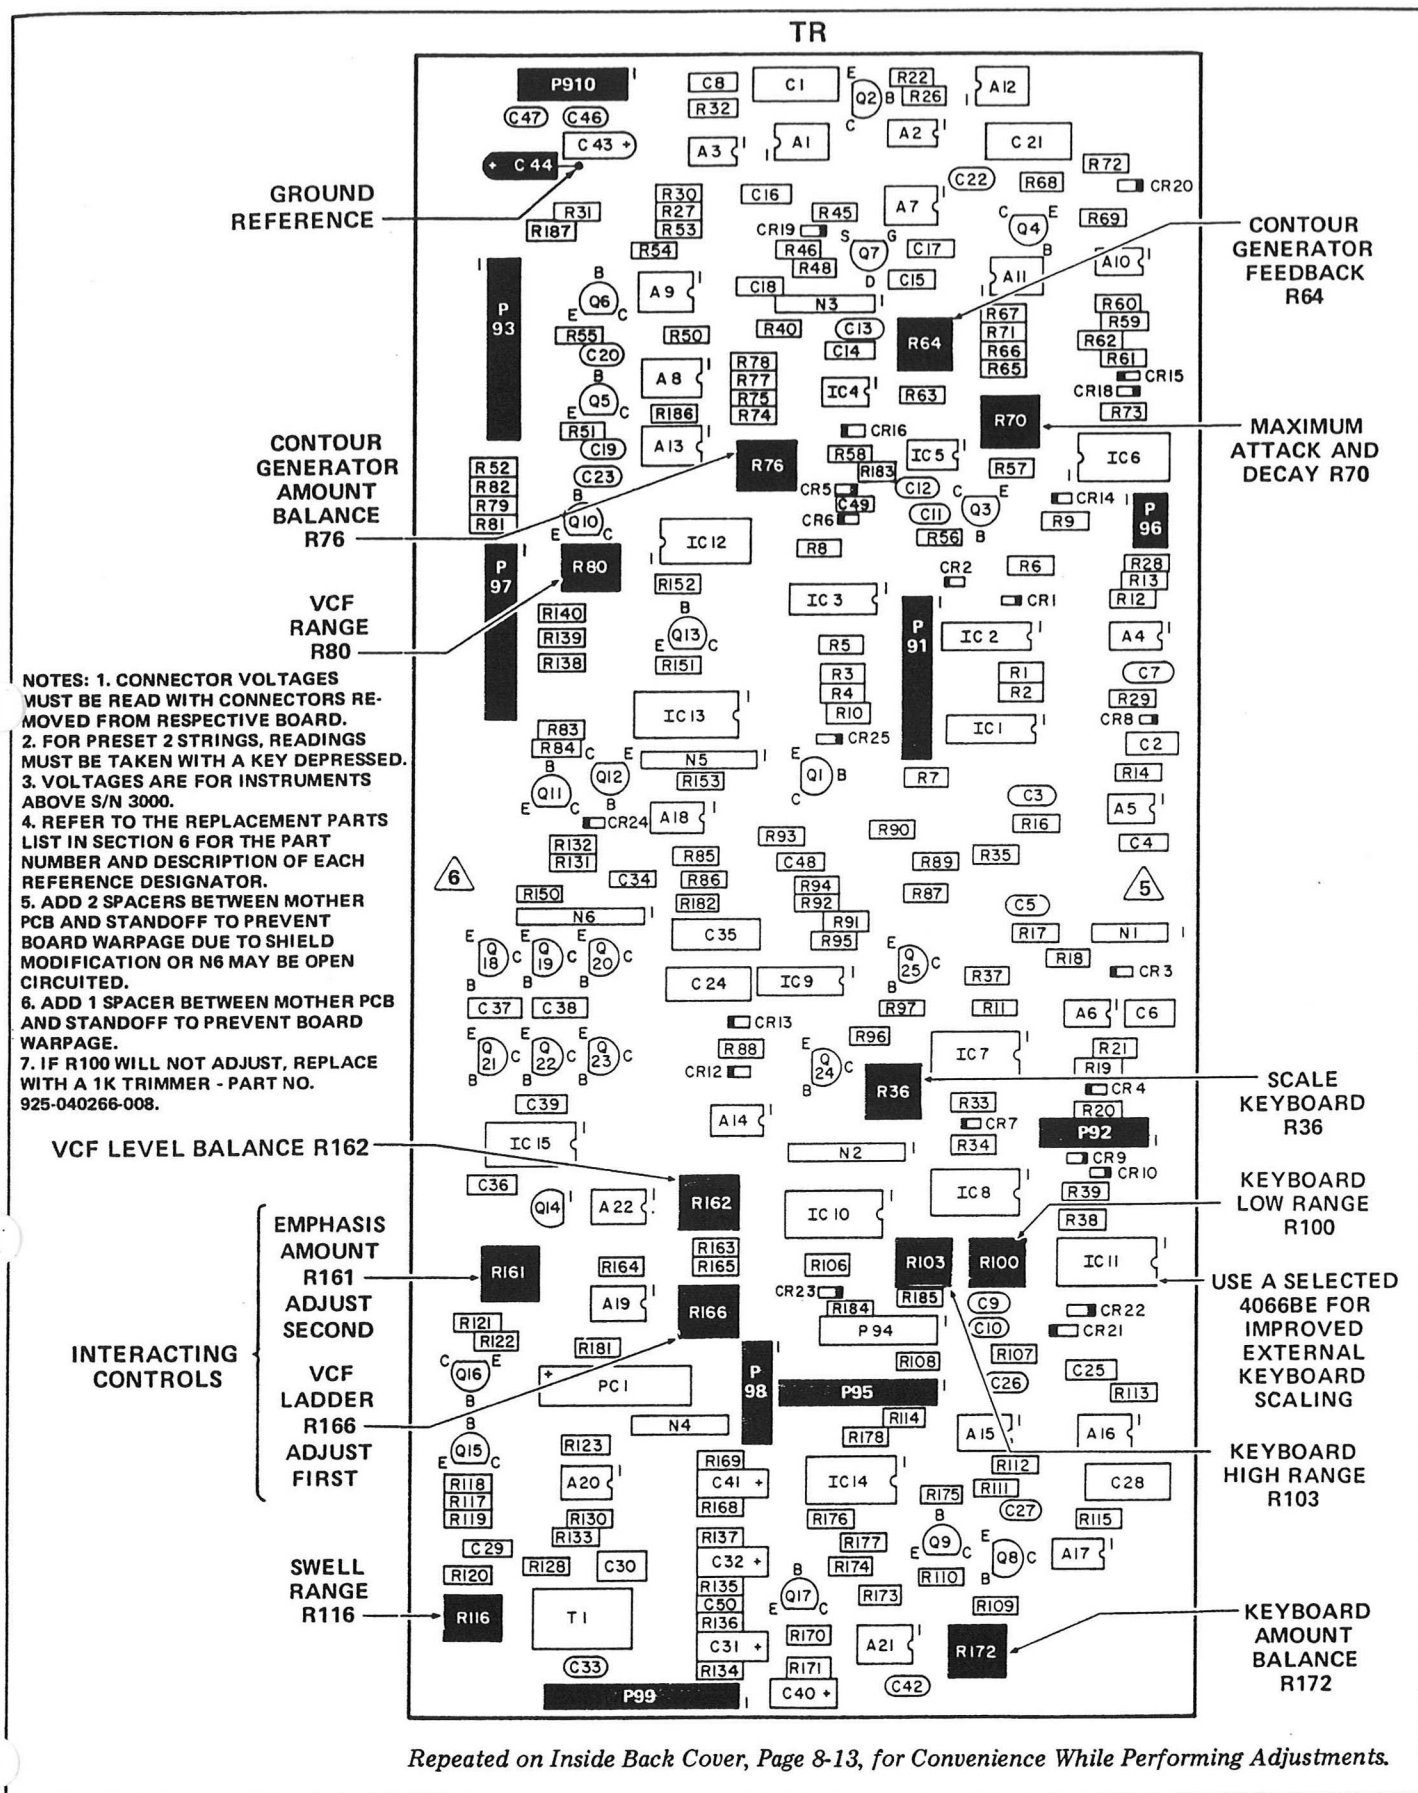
VOLTAGE CONTROLLED FILTER AND KEYBOARD CIRCUIT PRINTED CIRCUIT BOARD ASSEMBLY
